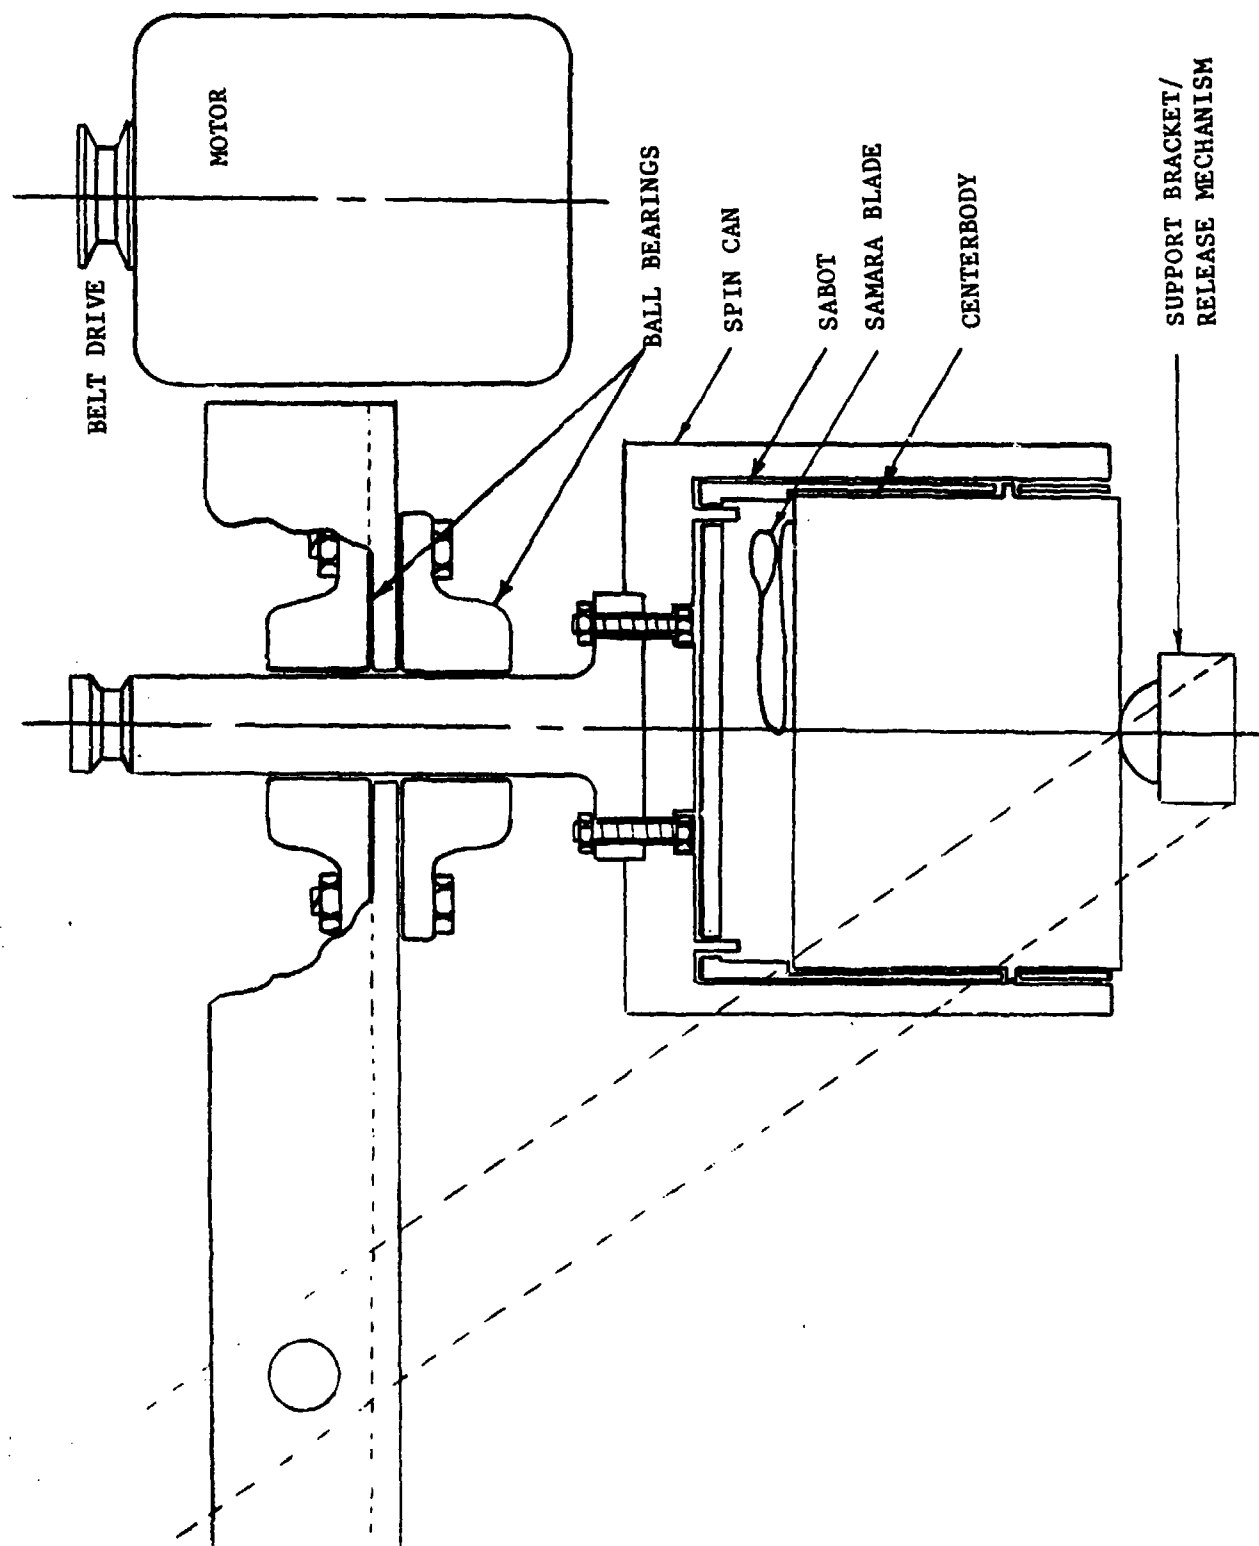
SCHEMATIC OF SPIN FIXTURE
